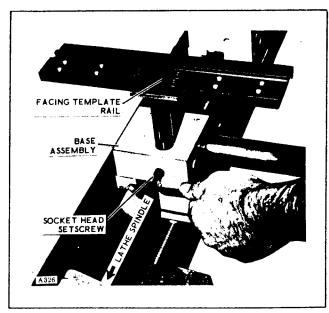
Installing Model 3058 Facing Template Rail on Universal Template Rail Assembly.
